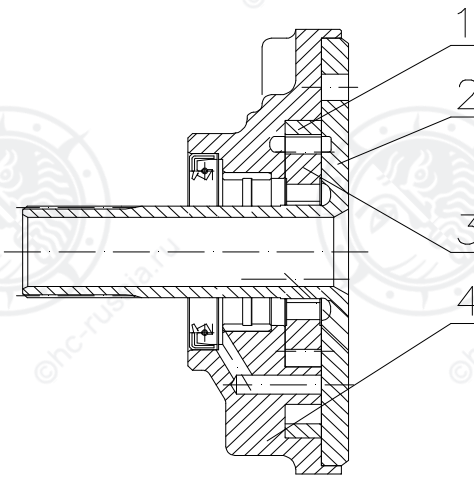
Structural diagram of xyqxf35-3000 oil pump assembly
